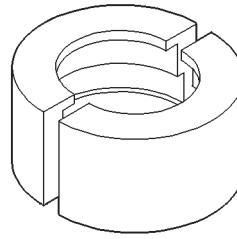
Crankshaft Sprocket Puller Jaws Tool 6820
